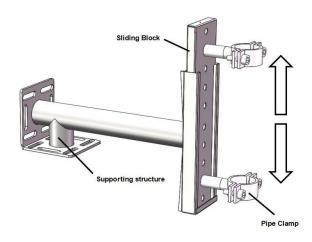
MA-120-B Submersion Adapter Mounting Bracket
